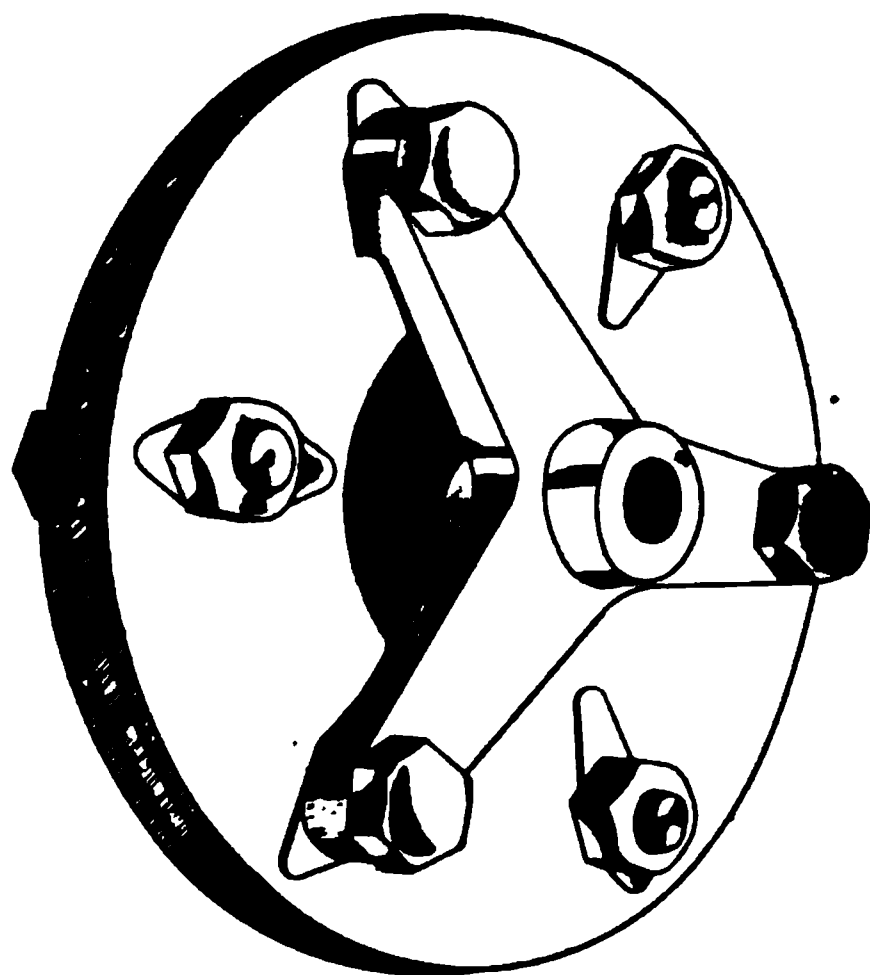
Laminated Discs Forming Flexible Shaft Coupling
